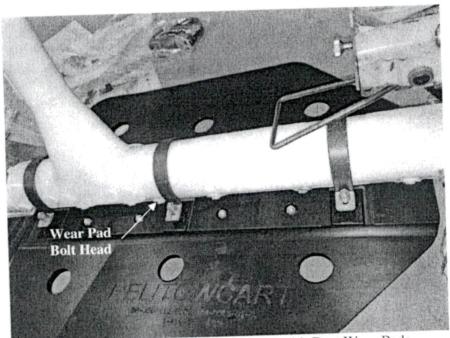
BearPaw BP350 Installed with Dart Wear Pads
